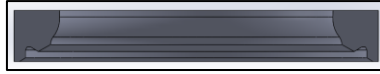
4 Cross-Section of Valve Seat 3D Form
